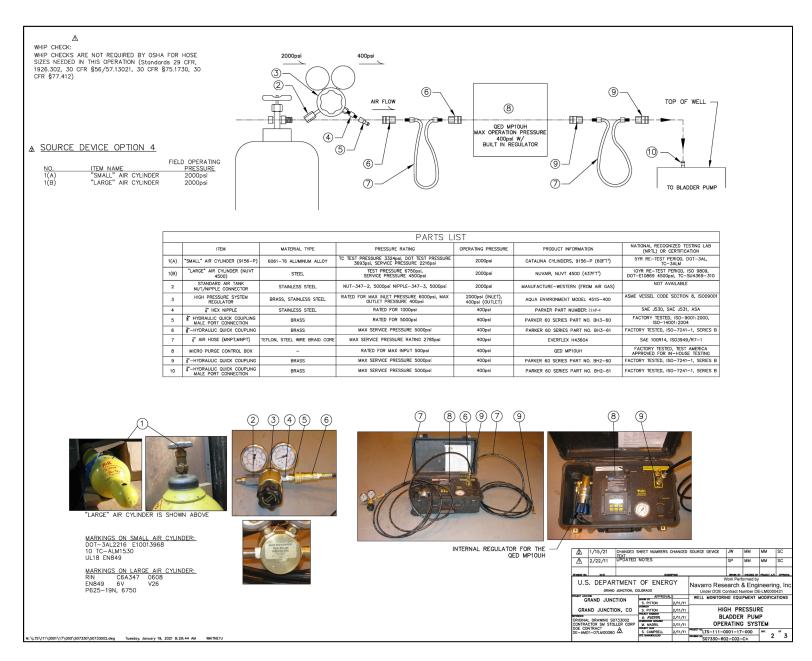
Compressed Air Assembly for MP-10 High-Pressure Controller and System Specifications
